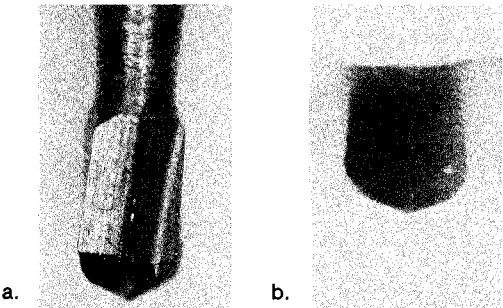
Busch #330 dental bur (a) and typical cutting pattern (b)
